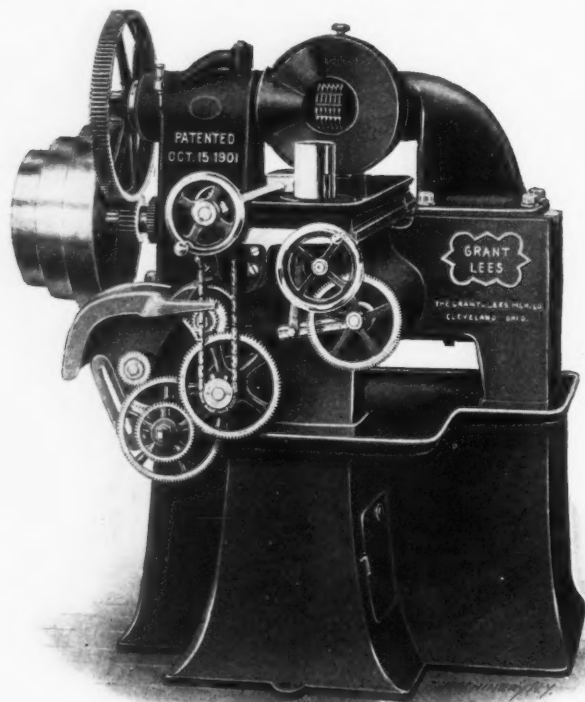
Grant-Lees Gear Generating Machine. Front View.
